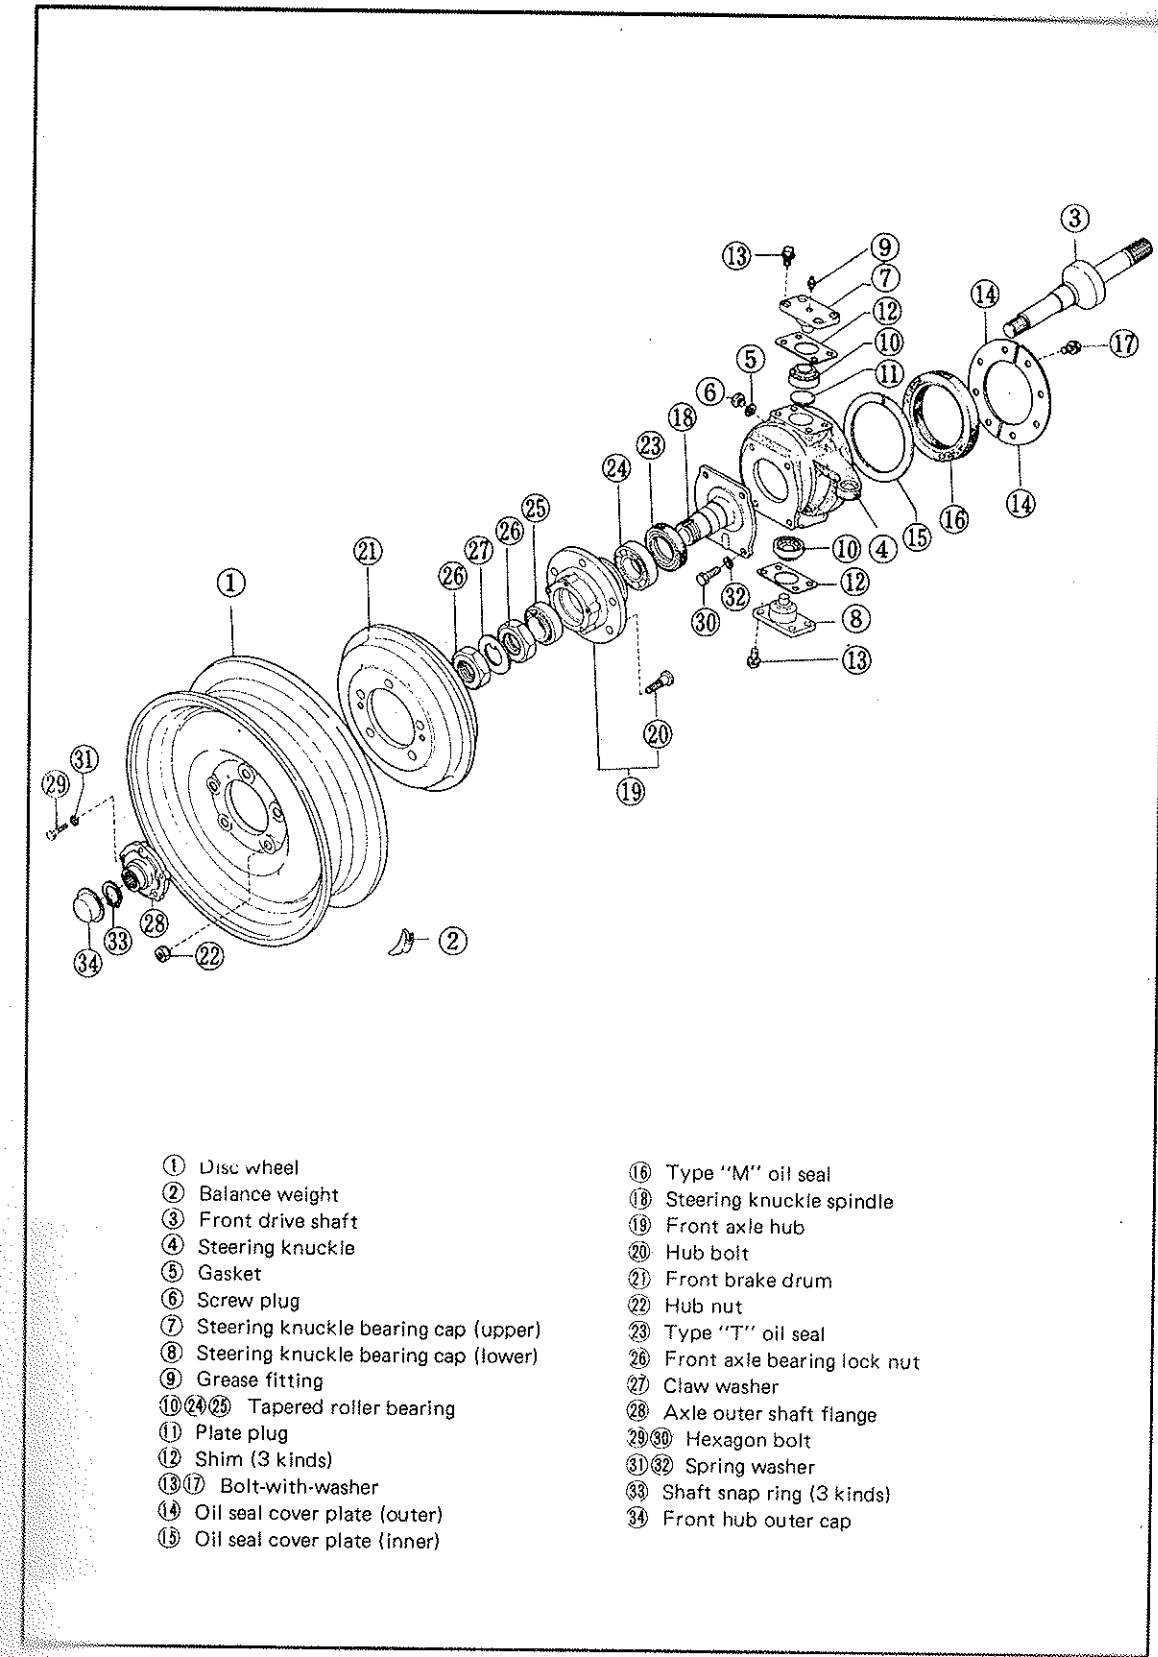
Front Axle Shaft and Disc Wheel Components
